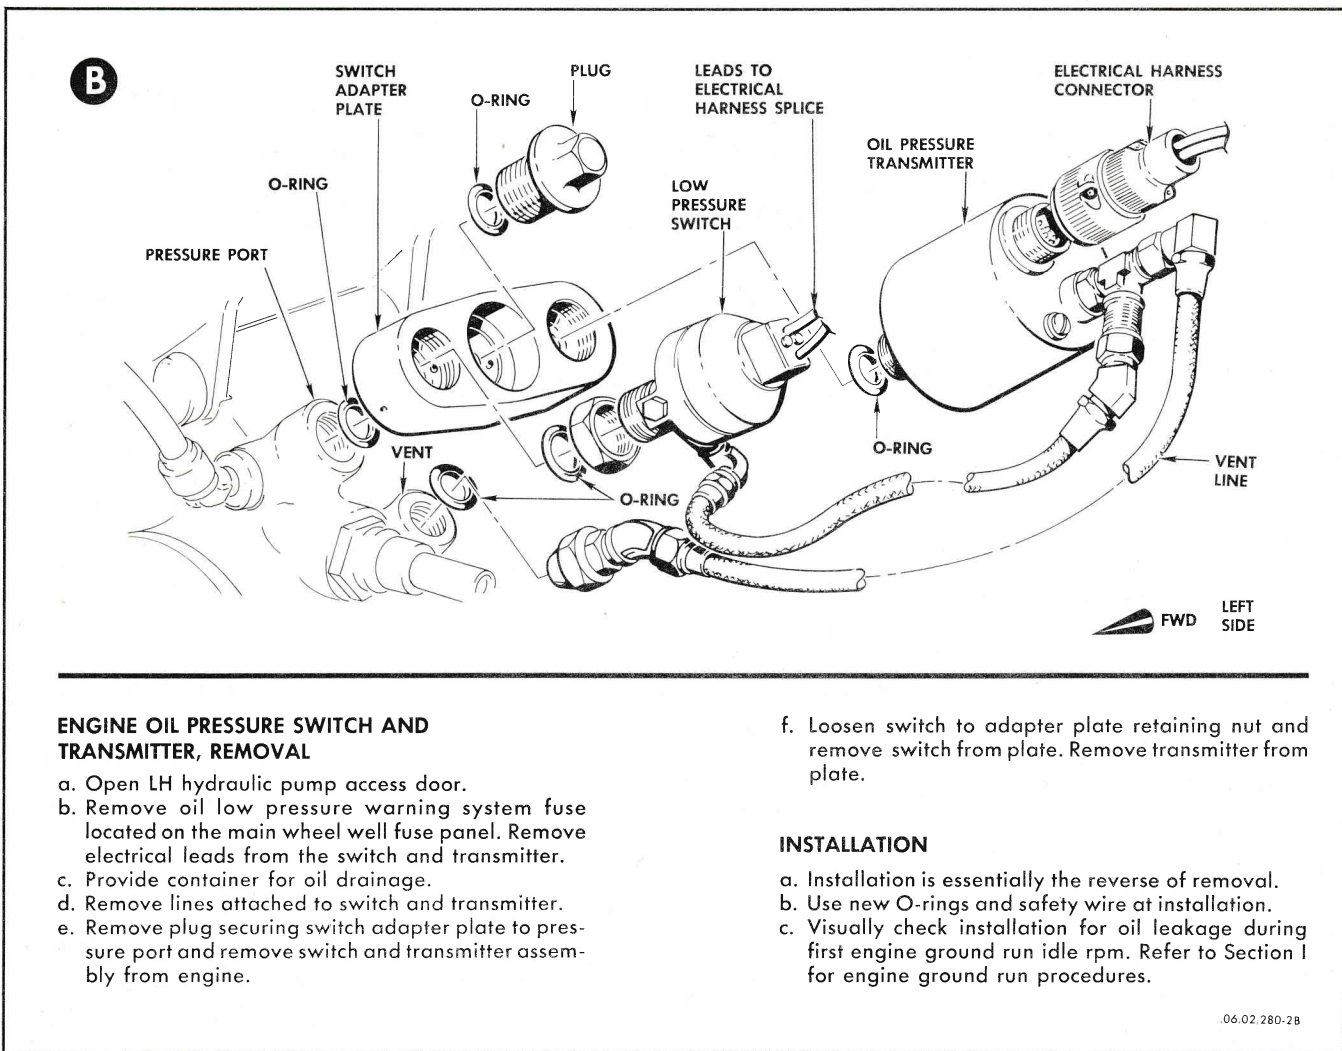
Replacement, Engine Lubrication System Components (Sheet 2 of 2)
